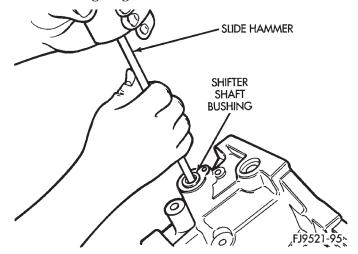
Crossover Shaft Bushing Removal INSTALLATION
